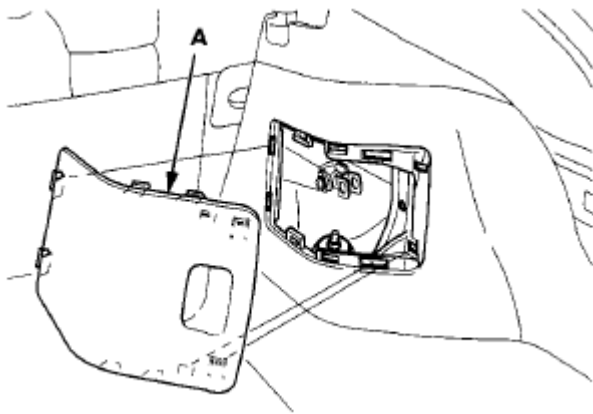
Identifying Access Panel On Cargo Area Side Trim - Right Side
